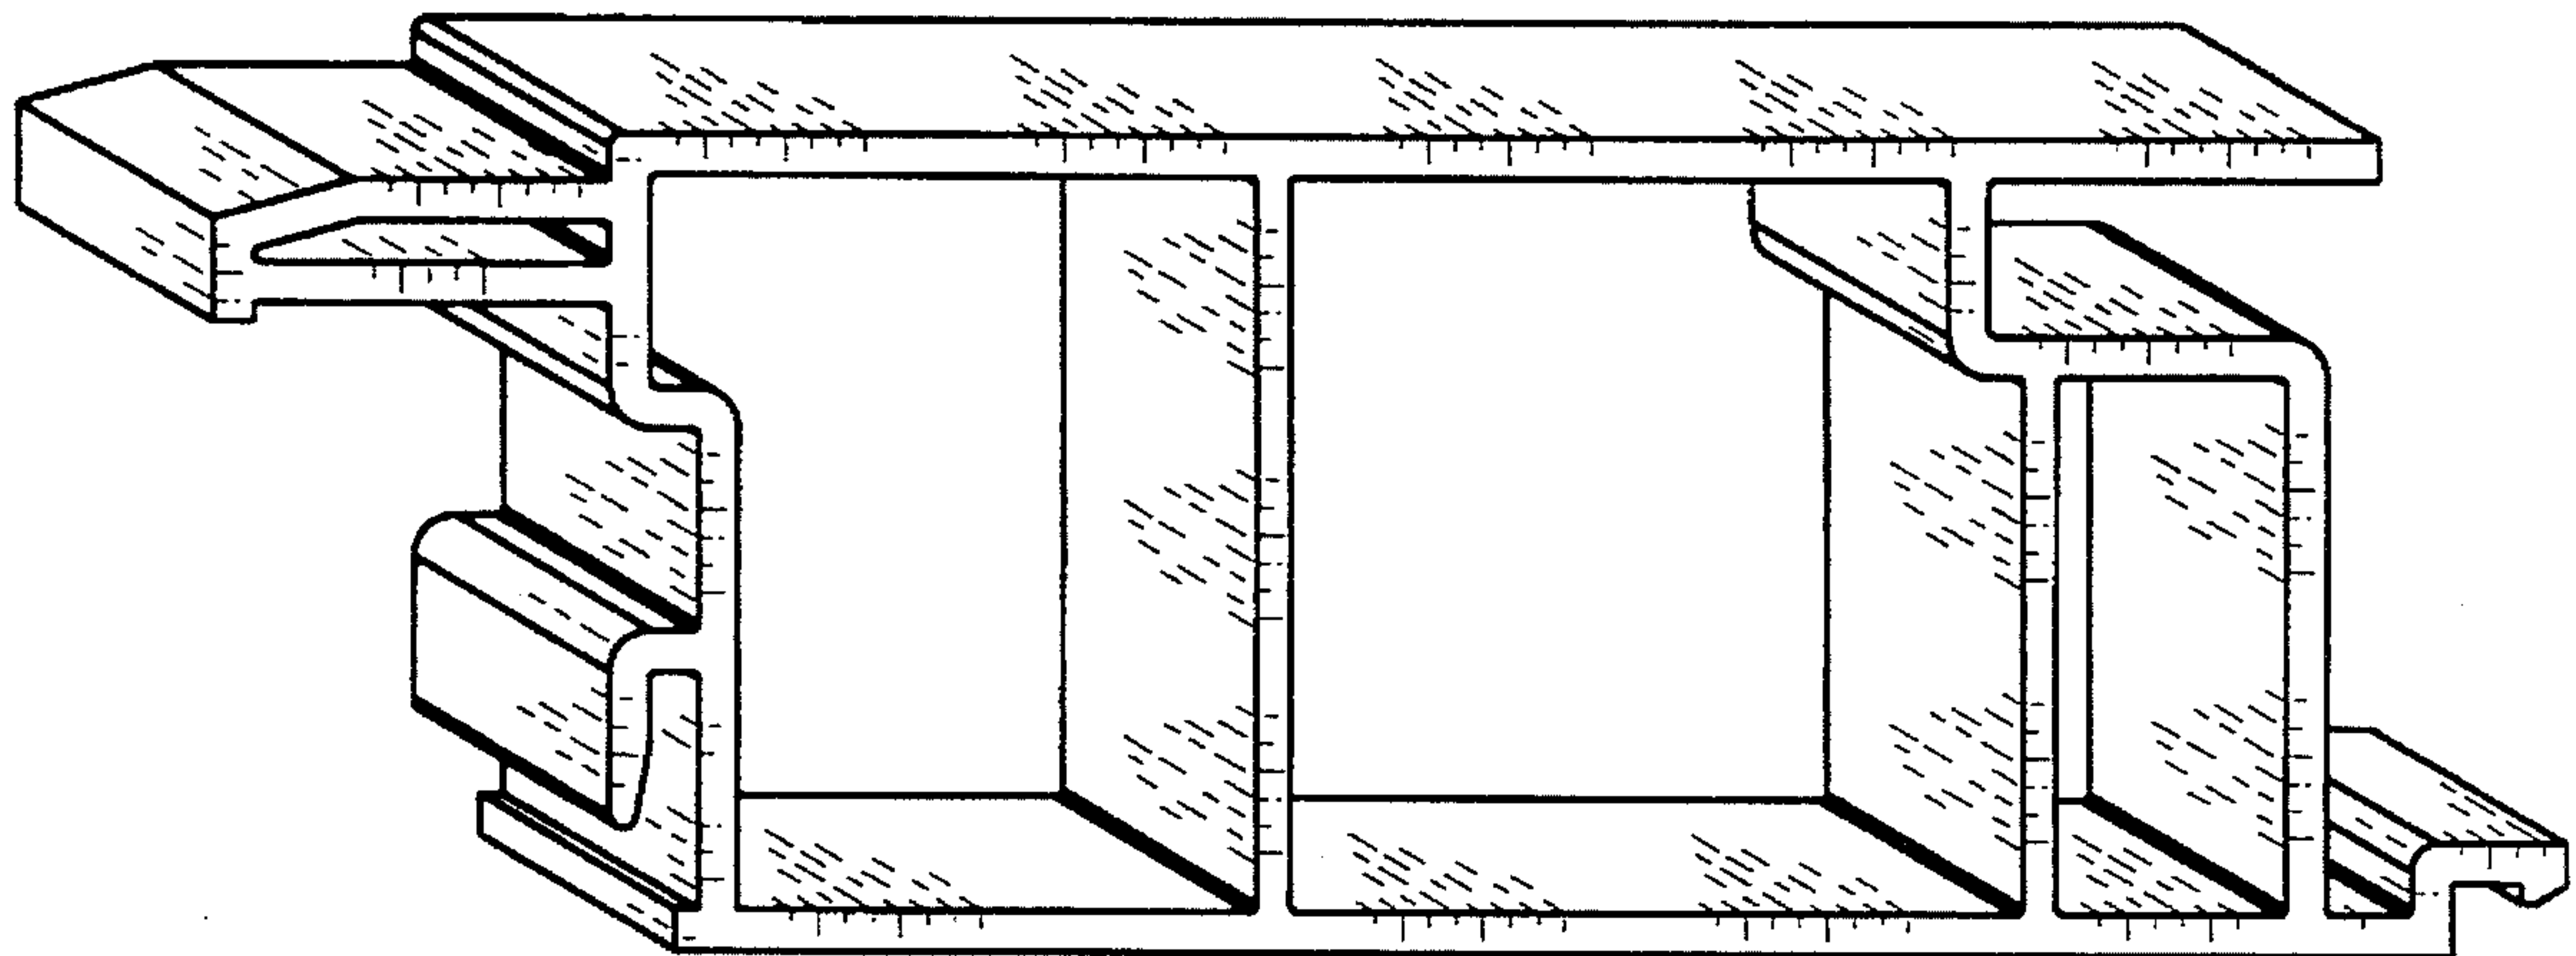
is a top right perspective view of a window component extrusion showing my new design, the window component extrusion being of indefinite length; and, FIG. 2 is a bottom left perspective view thereof.
